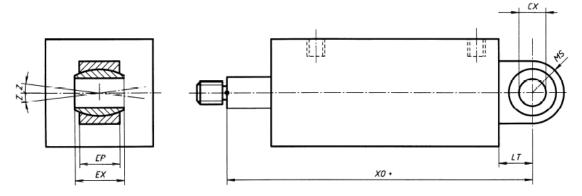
MP5 — Cap mounting, fixed eye with spherical plain bearing
